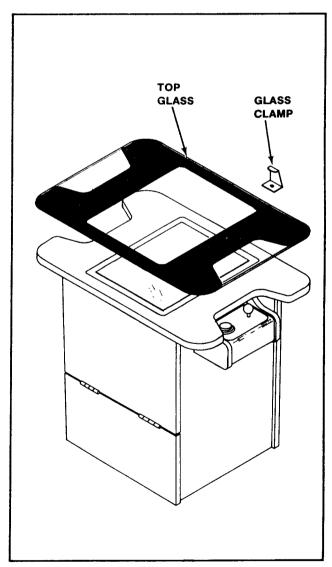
Removing Top Glass & T.V. Bezel — Cocktail
